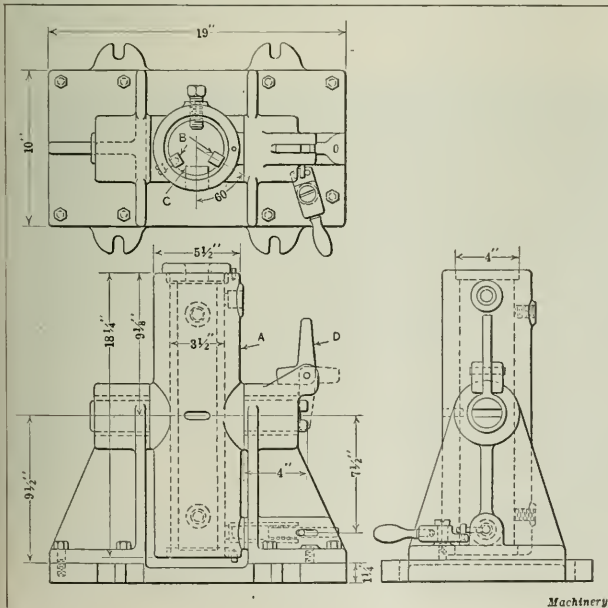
Revolving Fixture in which the Spindle Sleeves are located while drilling
